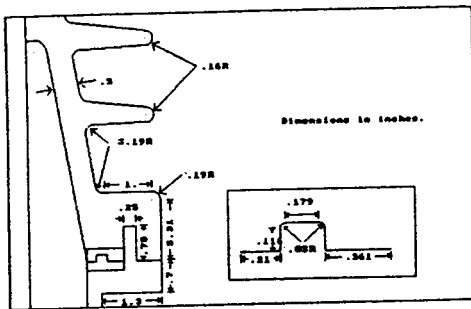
Dimensions near lower skirt, for SF6 resin bushing problem (EEM model).
